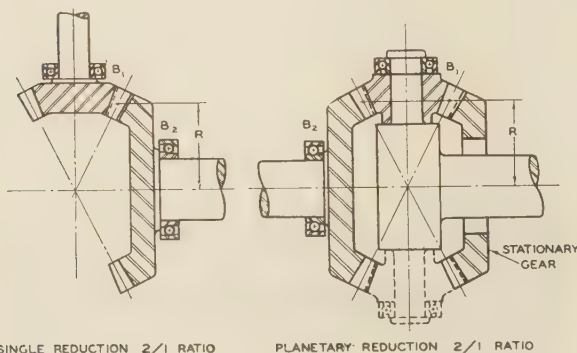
COMPARISON OF SINGLE-REDUCTION BEVEL GEARS AND PLANETARY BEVEL GEARS
